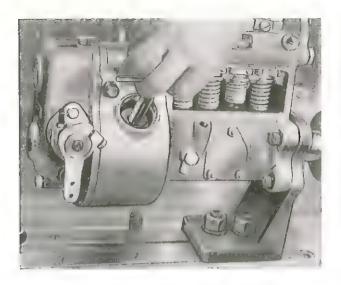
Adjusting the fly-weight opposing springs using wrench A 527008.
